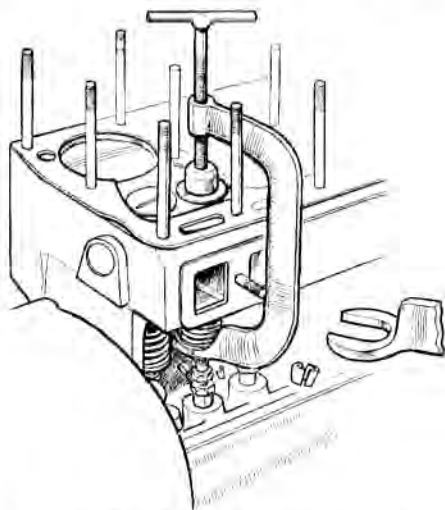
THE MORRIS VALVE COMPRESSING TOOL IN ACTION
